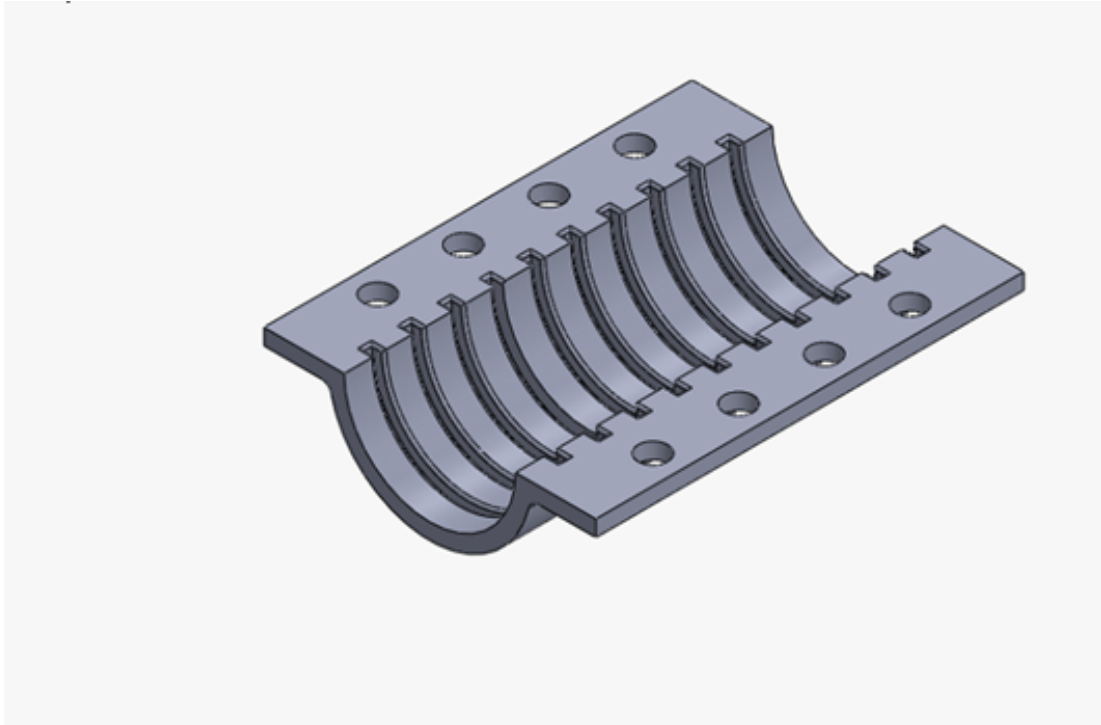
Three-dimensional CAD model of the grooves inside the pipe for holding the lenses and nozzles
